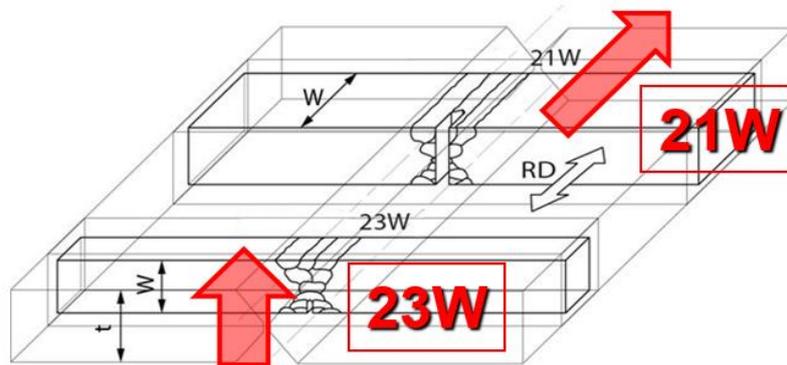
TPB specimen locations in welded joint with notch directions (RD = rolling direction).
